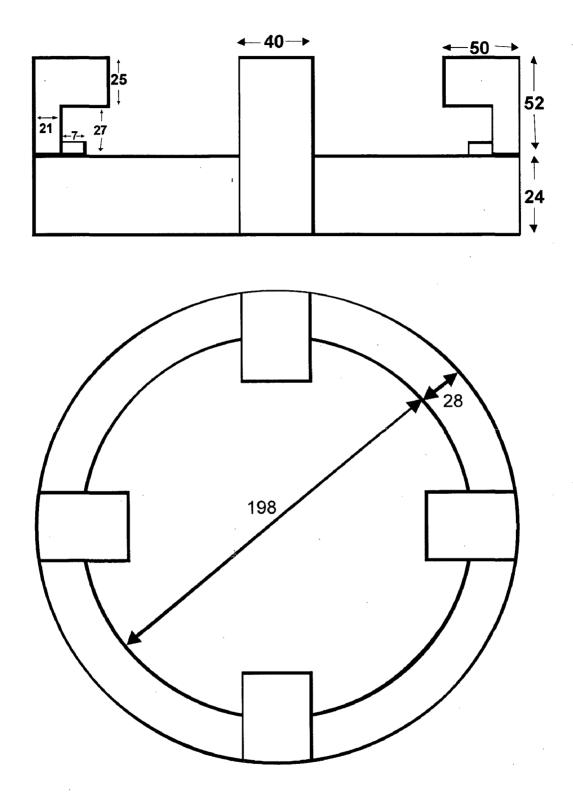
Details of Stand Assembly (dimensions in mm)
